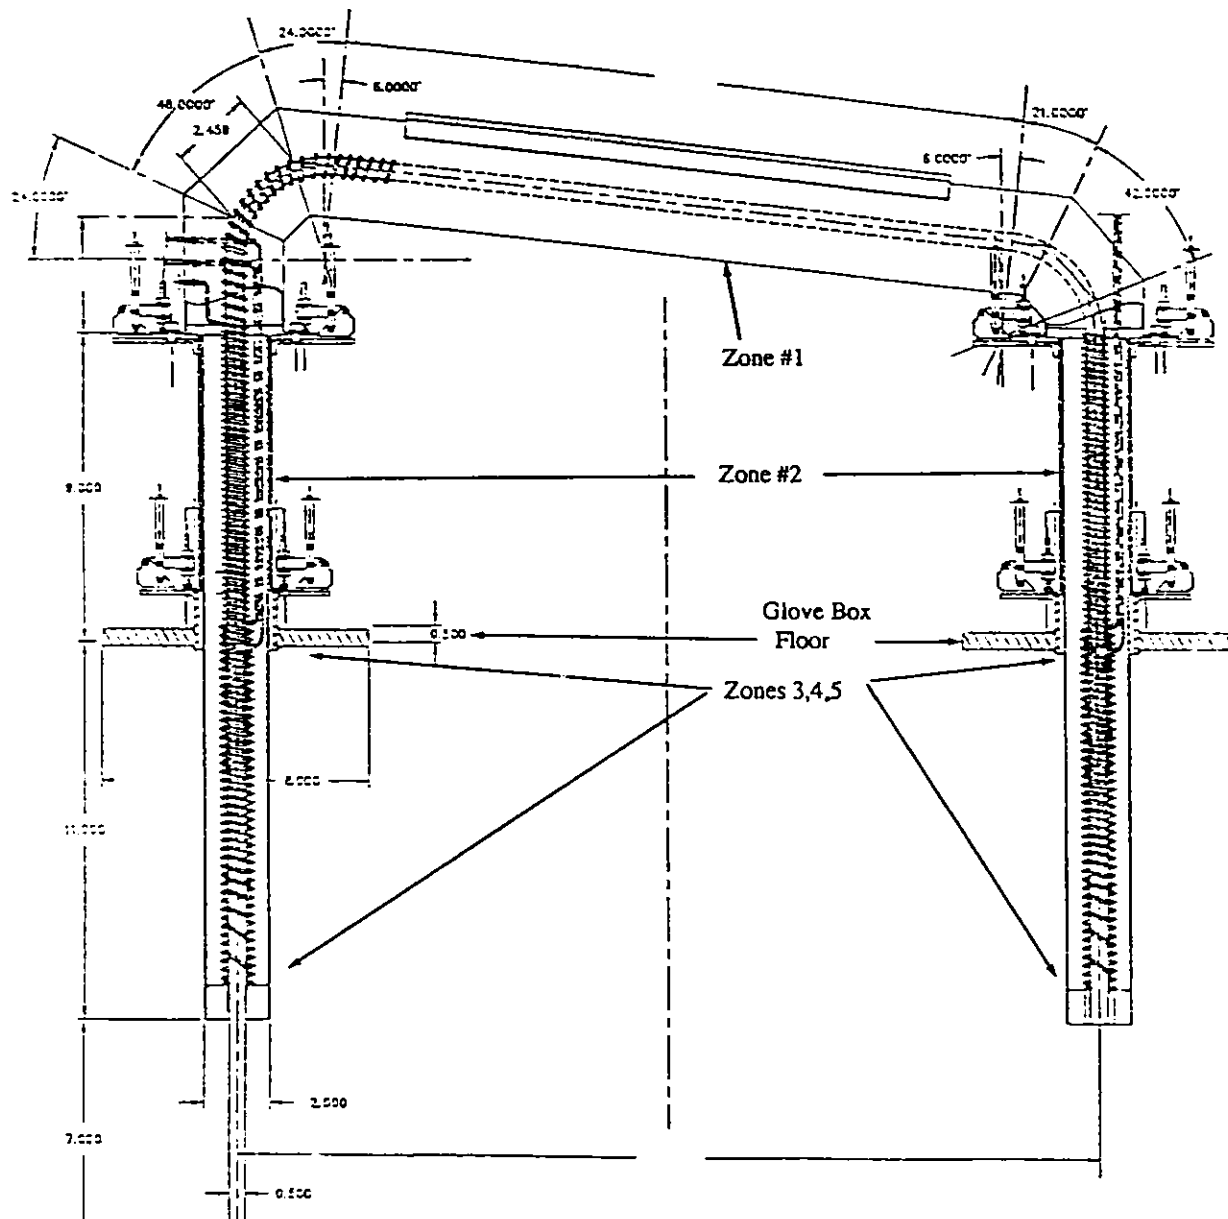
Engineering Drawing for Proposed SRS Transfer Line
